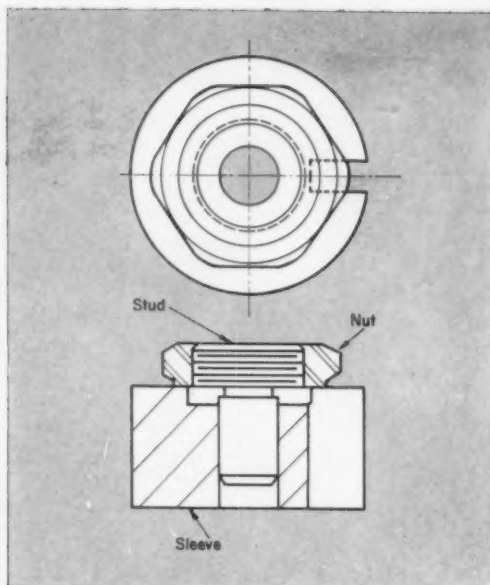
Functional gage for checking face runout of nut. Threaded stud simulates bushing and sleeve simulates V-ring.
